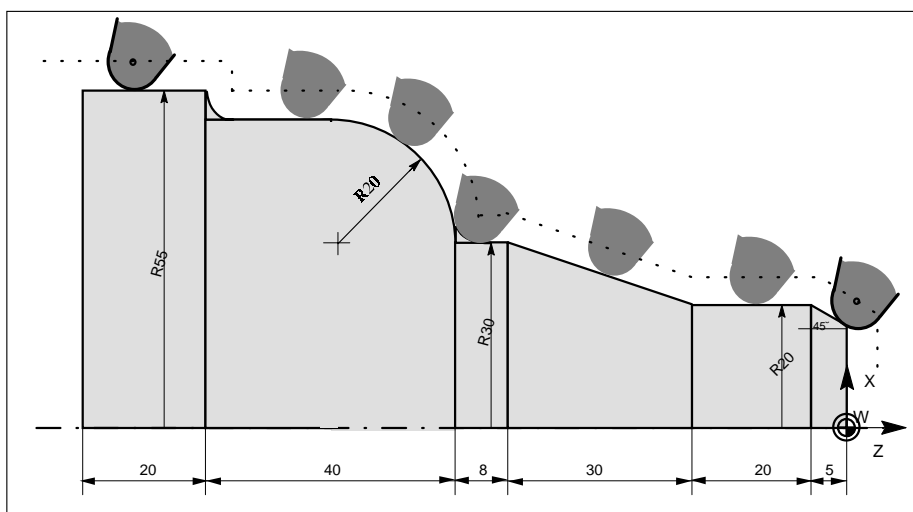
Example of tool radius compensation, tool nose radius magnified
